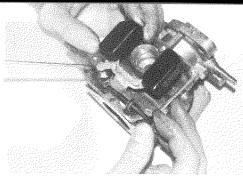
Position the float as shown, before sliding in the retaining pin. Ensure that the small metal tag which operates the needle valve is positioned as shown. The float level should not need to be changed, but you should refer to the workshop or carburettor manual if you feel this is necessary.
